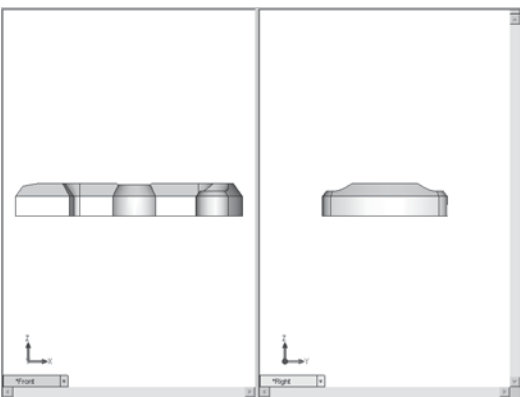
Drawing area divided in two columns vertically using the Two View - Vertical tool
